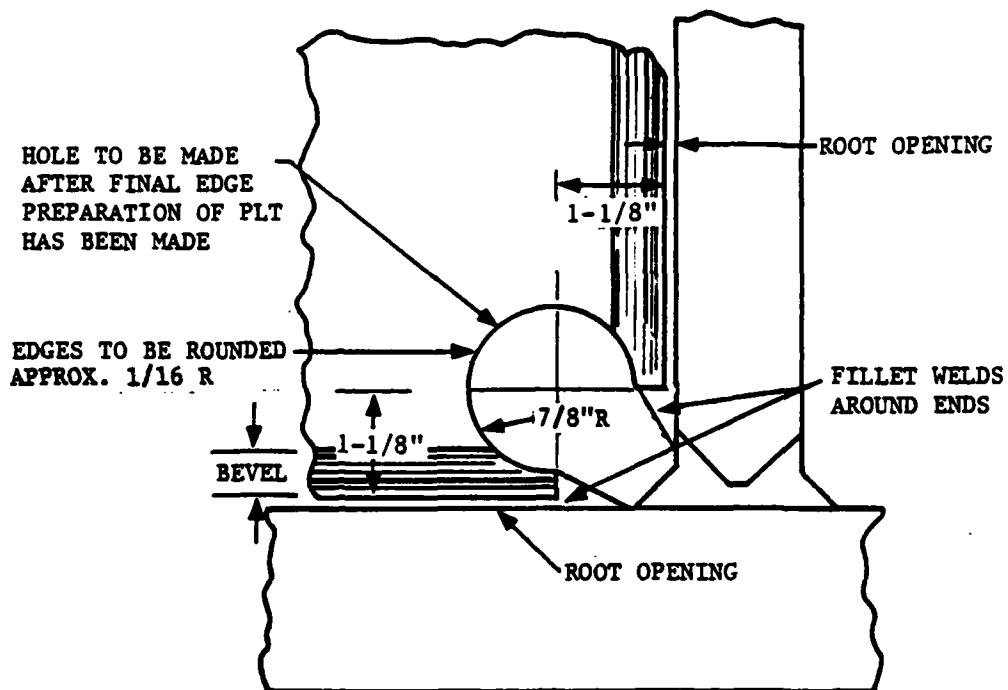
Alternate Drain or Vent Opening for Tank Structure
